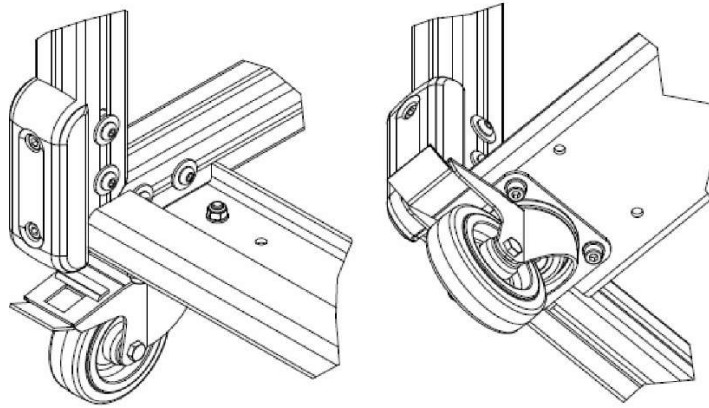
Position of bolts and nuts for 100-mm (3.94-in) wheels
